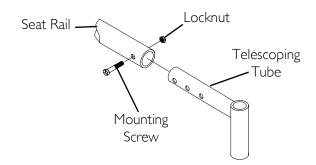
Installing/Removing/Adjusting the Telescoping Front Frame Tubes
